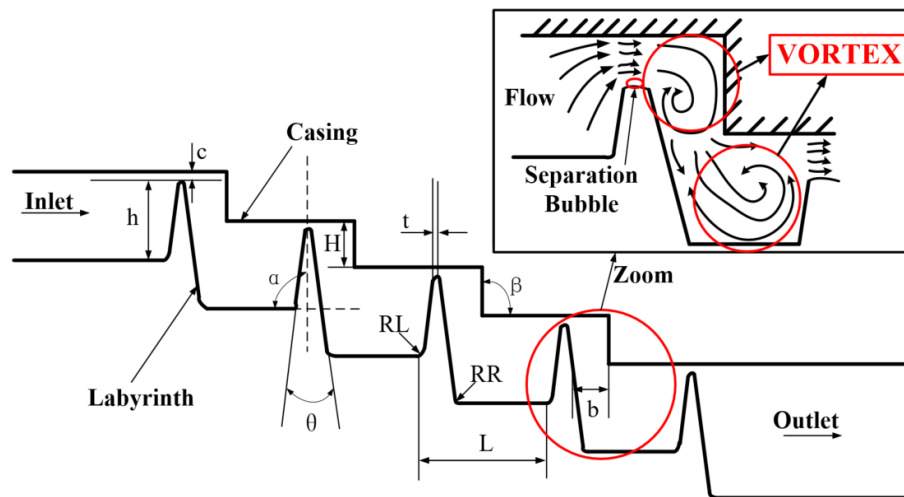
Geometrical dimension drawing of labyrinth seal structure.
